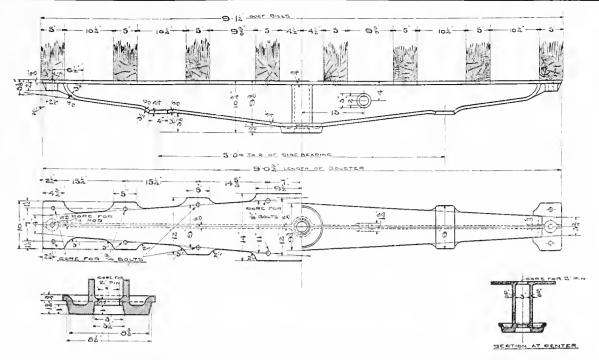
Cast Steel Body Bolster, I-Beam Section. American Steel Foundries.
